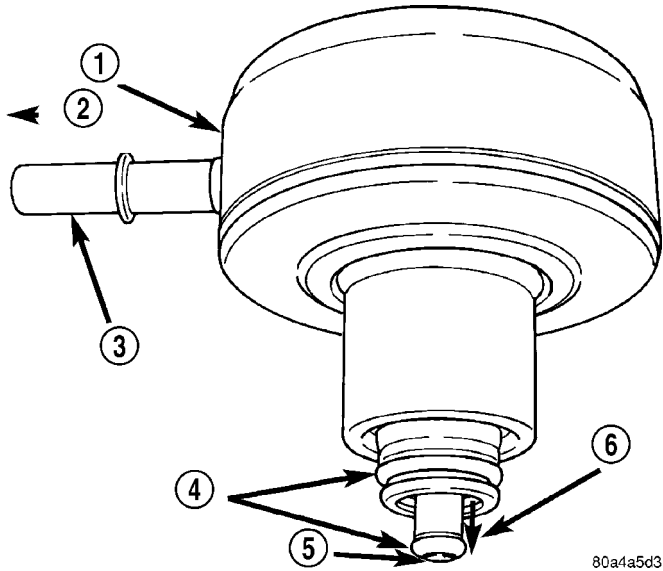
Fuel Filter/Fuel Pressure Regulator
